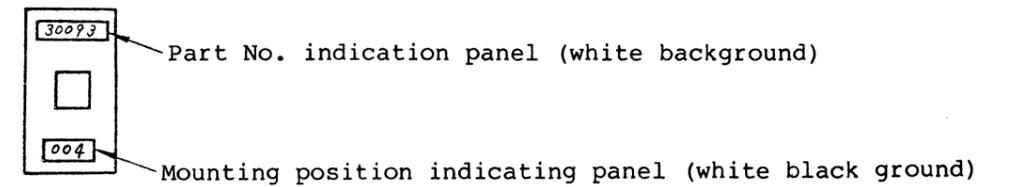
MLPC Circuit Board Assembly (LY-44989-1)
